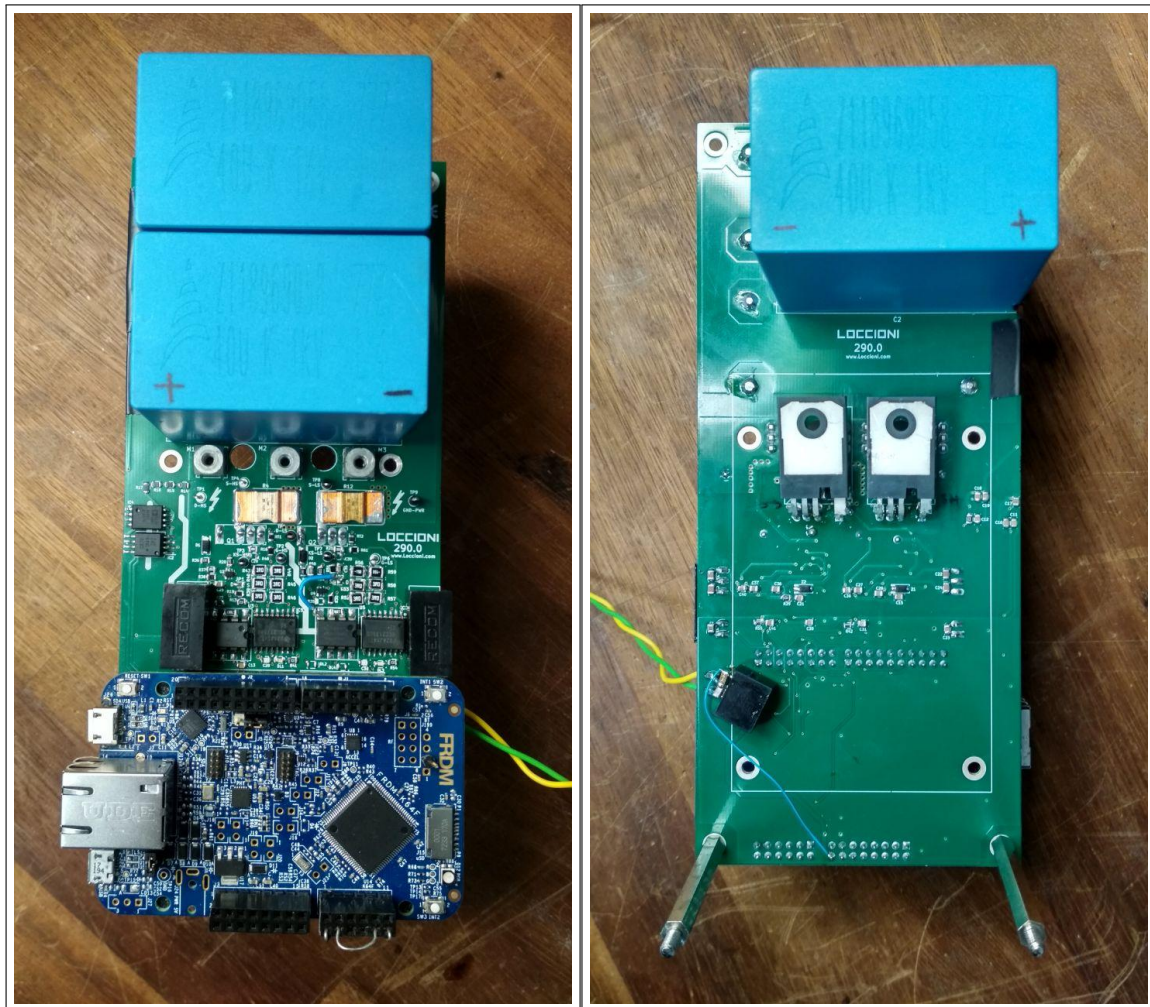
Left: top view of the board. Right: bottom view of the board (heat sink removed). PCB size:
